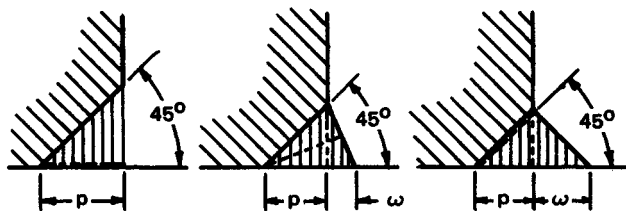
Comparison of weld joints with and without reinforcing fillet welds. (*The Lincoln Electric Company.*)
